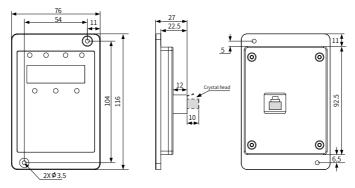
Mounting dimensions of MD32NKE1 (unit: mm)
